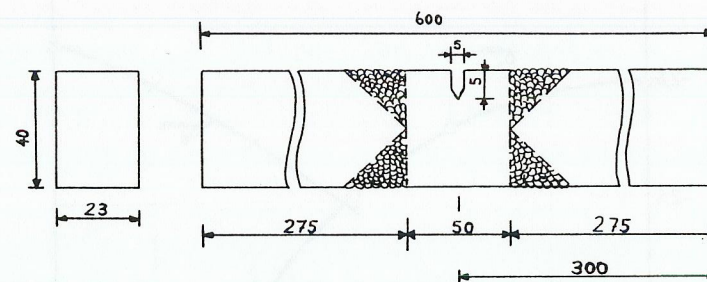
Dimensions of the test specimen. The weld is only for specimen ST. All dimensions in mm.
